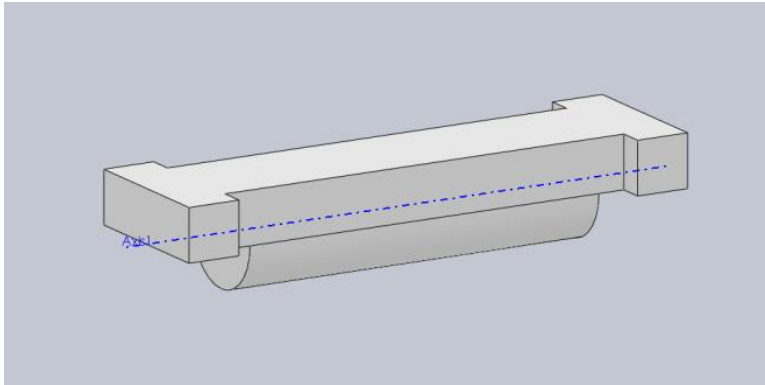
The insert added to the mold of the straight and bounded actuators to form the hollow tube within the actuator.
